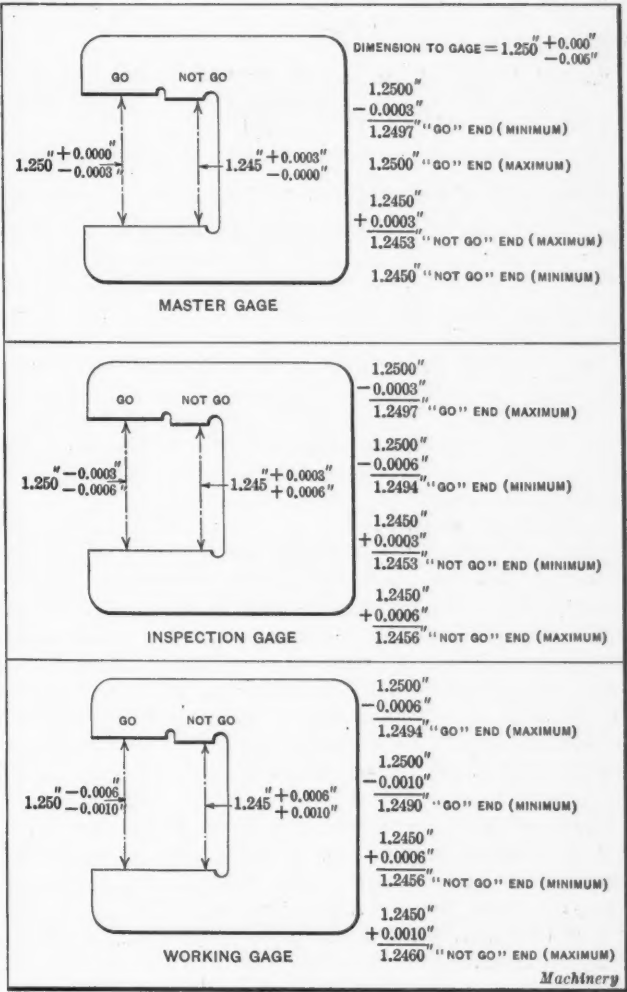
Master, Inspection, and Working Snap Gages showing Gage Tolerance System
